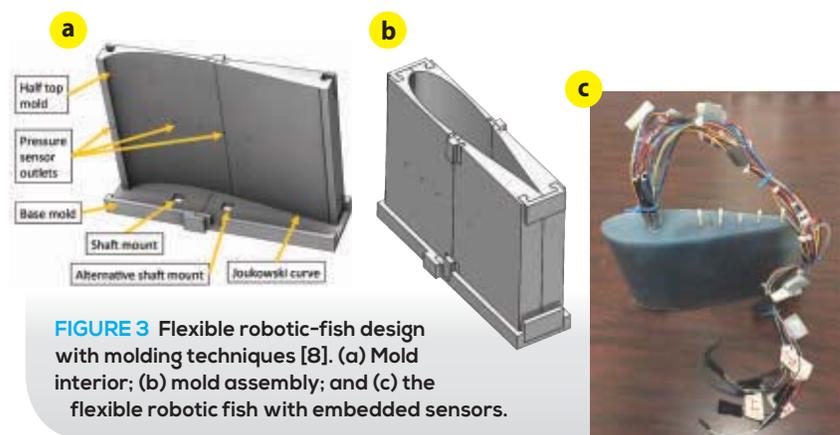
Flexible robotic-fish design with molding techniques [8]. (a) Mold interior; (b) mold assembly; and (c) the flexible robotic fish with embedded sensors.
